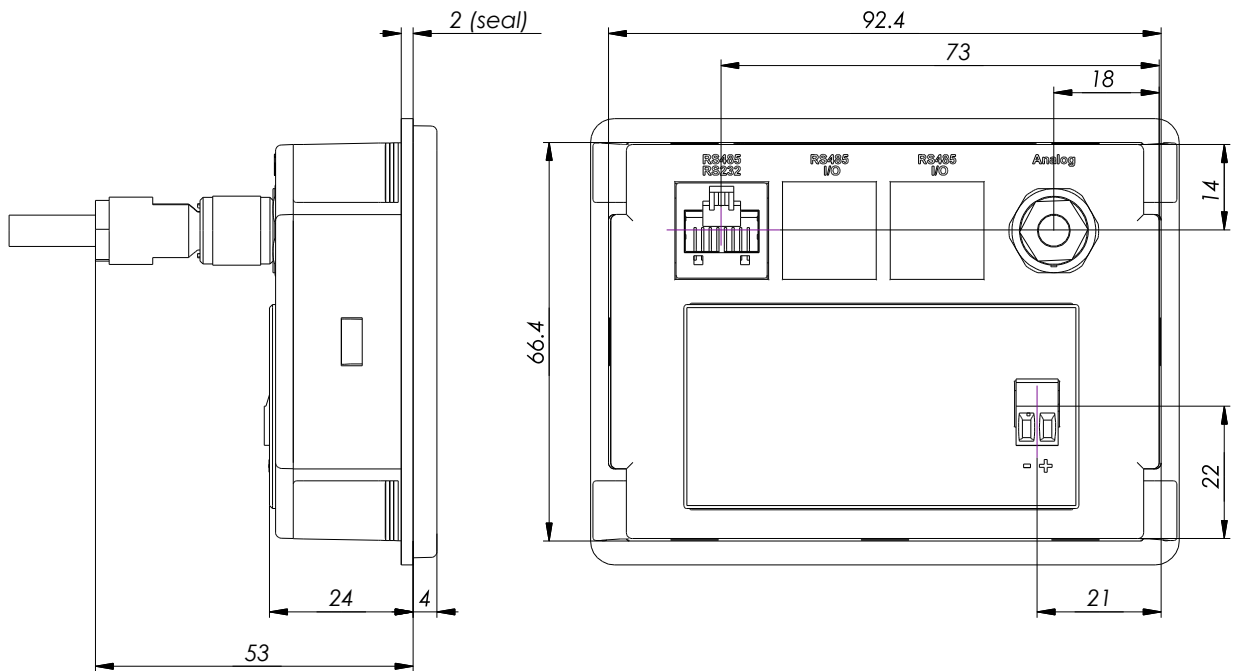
Dimensions of IZ16E-100-6-XX.X-1
